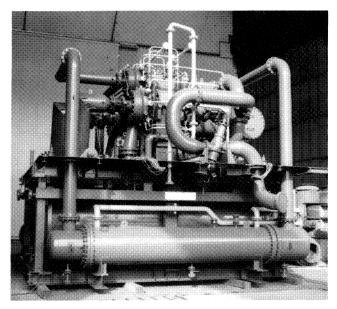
Complete Package of a Six Stage IGTM for Oxygen $V = 25,000 \text{ m}^3/h$; = 17.0; $P_c = 5.500 \text{ kW}$.
